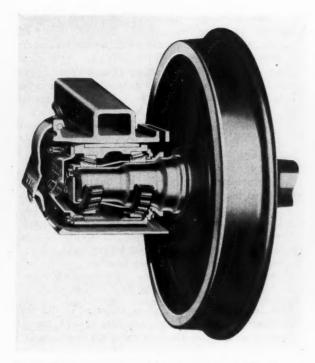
Roller-bearing journal box applied in A.A.R. standard plain-bearing integral-box side frame
